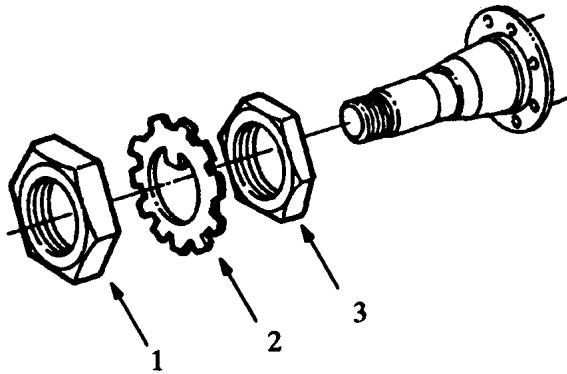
Rear Axle Jam Nut Installation - Bend Lockwasher Type
